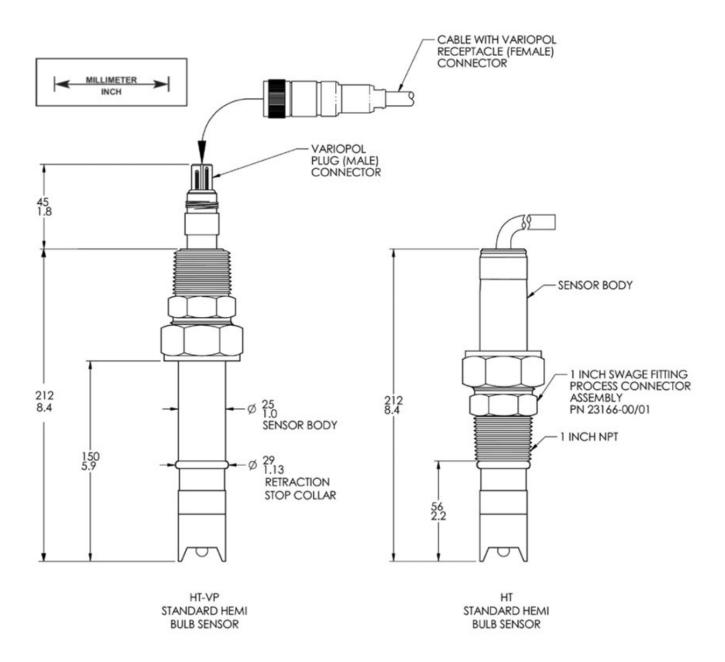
Rosemount 3300HT/3300HTVP sensor dimensional drawing
